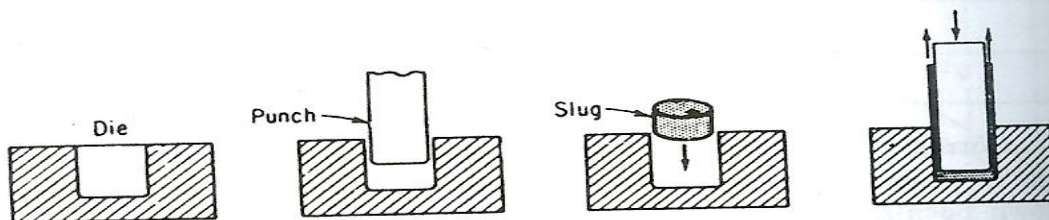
Backward extrusion. (Courtesy Design Engineering.)
